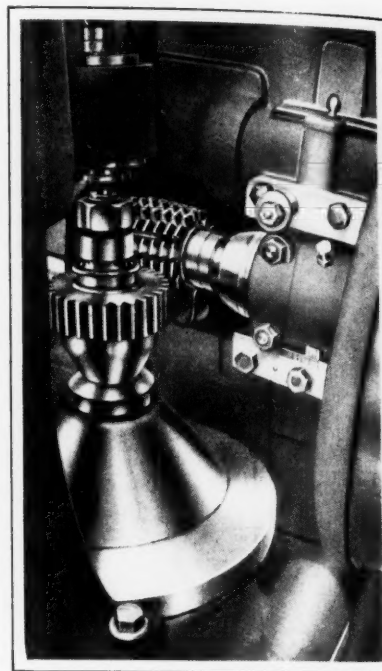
Close-up View of the Work-arbor and Hob Spindle
